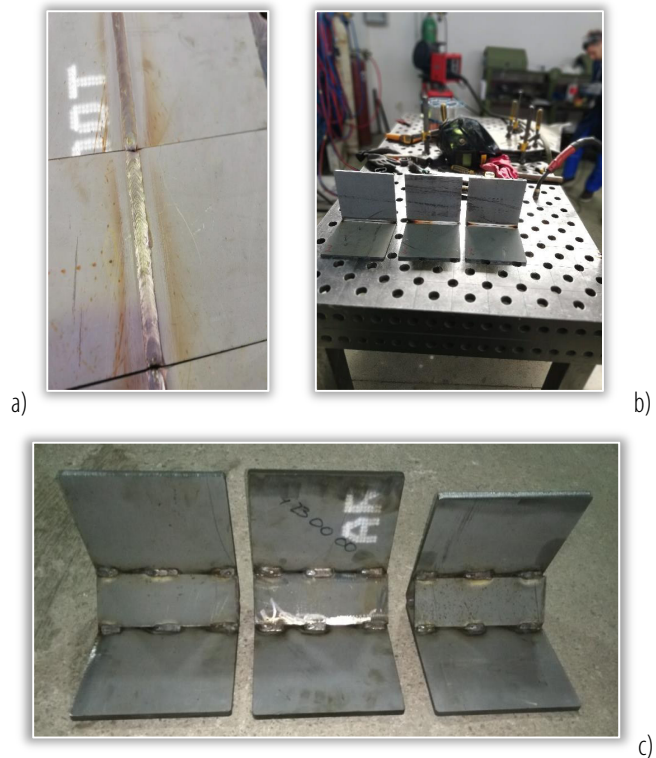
Welded plates: a) butt, b) corner and c) corner-edge joint.
